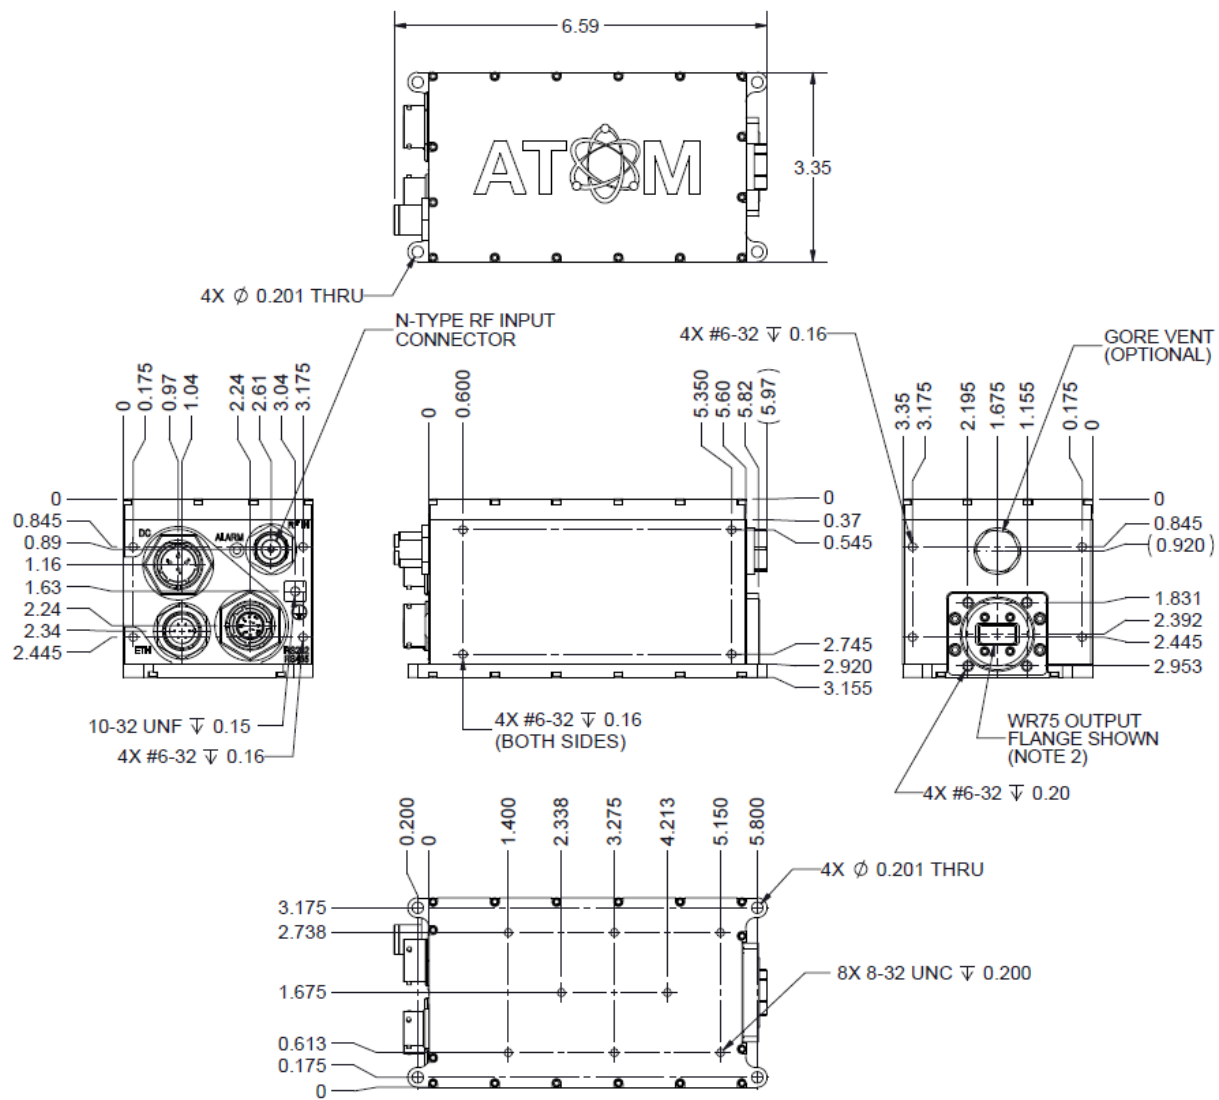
20-40-80W Ku GaN BUC/SSPA, Baseplate Cooled
